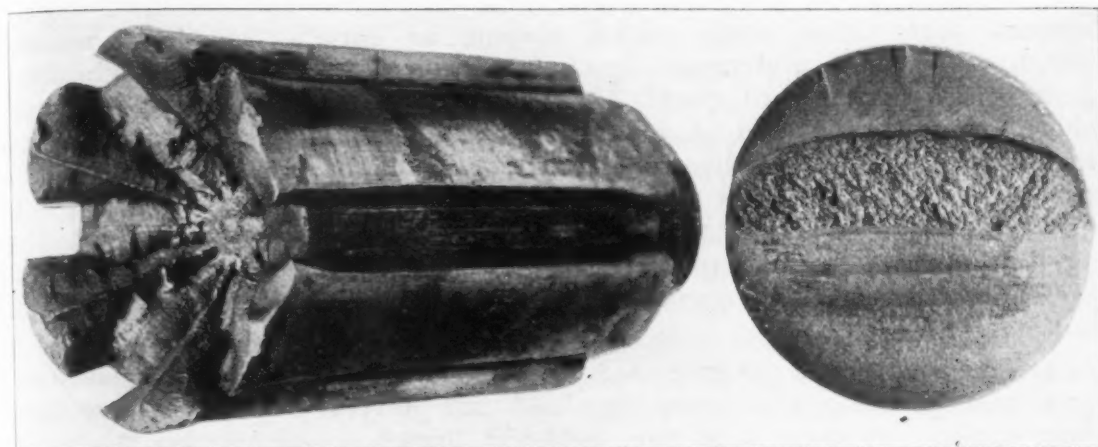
(At the left) Shows the Fatigue Fracture of a Splined Steel Shaft.
